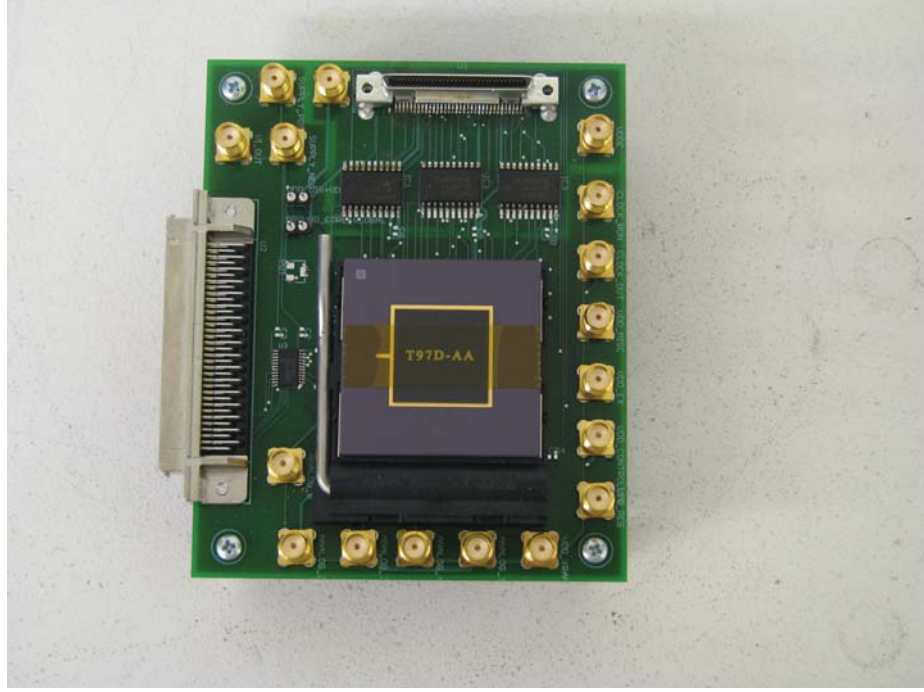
PCB hosting XRAM enabled SIMD prototype
